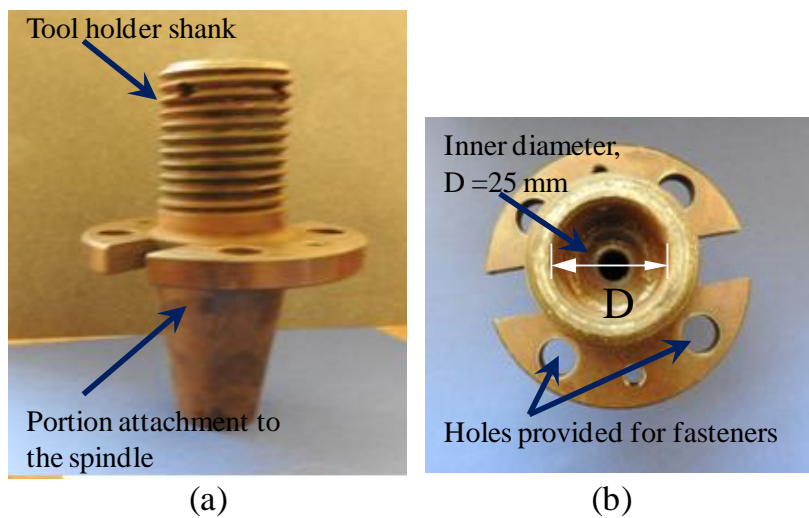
Photograph showing (a) front view and (b) top view of the tool holder.
